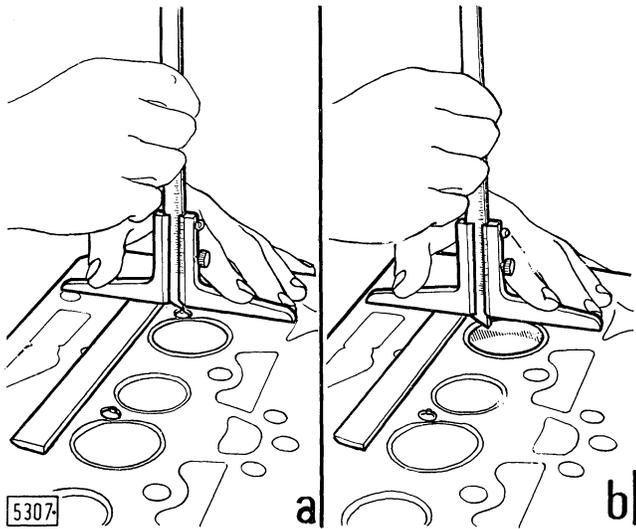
Checking Fuel Injector Protrusion (a) and Valve Depth in Cylinder Head
